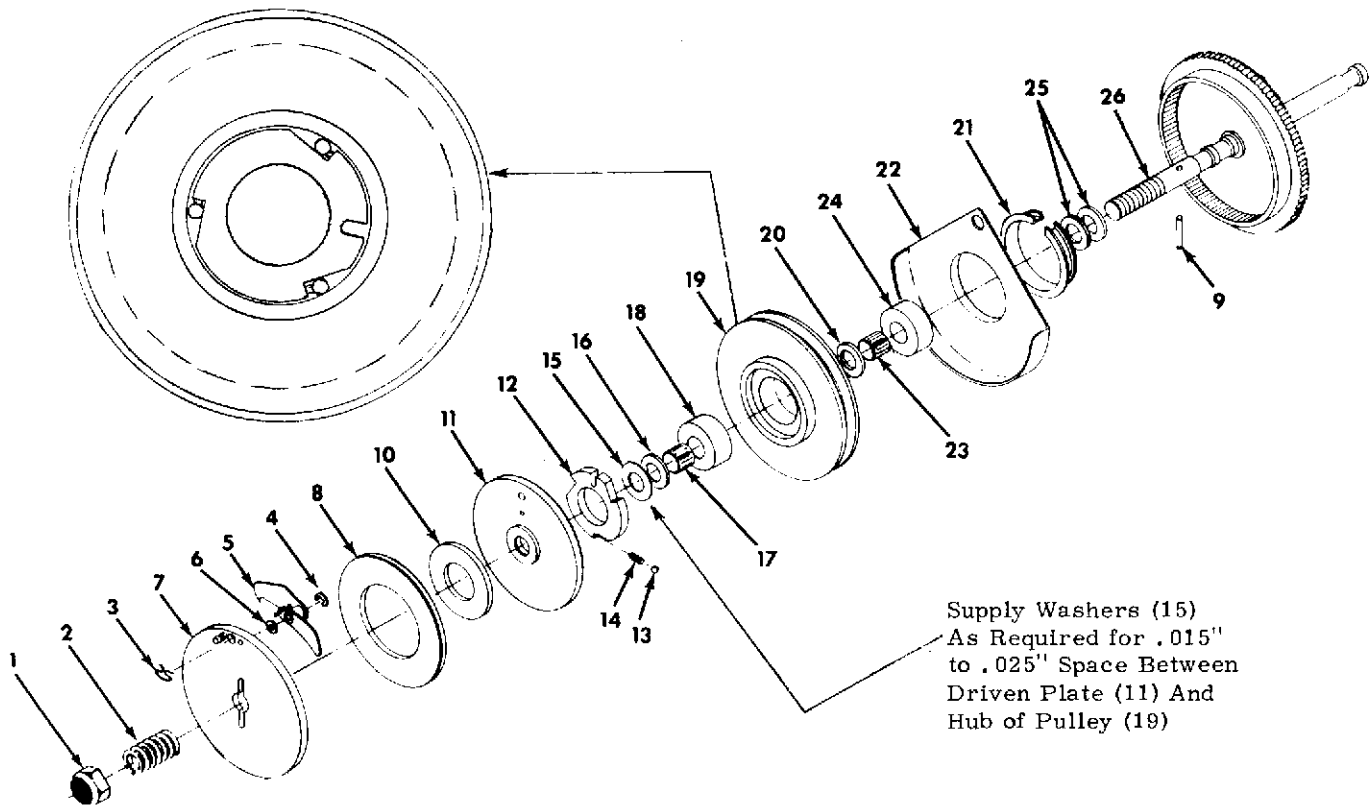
DISASSEMBLY AND REASSEMBLY OF FILM FEED CLUTCH ASSEMBLY
